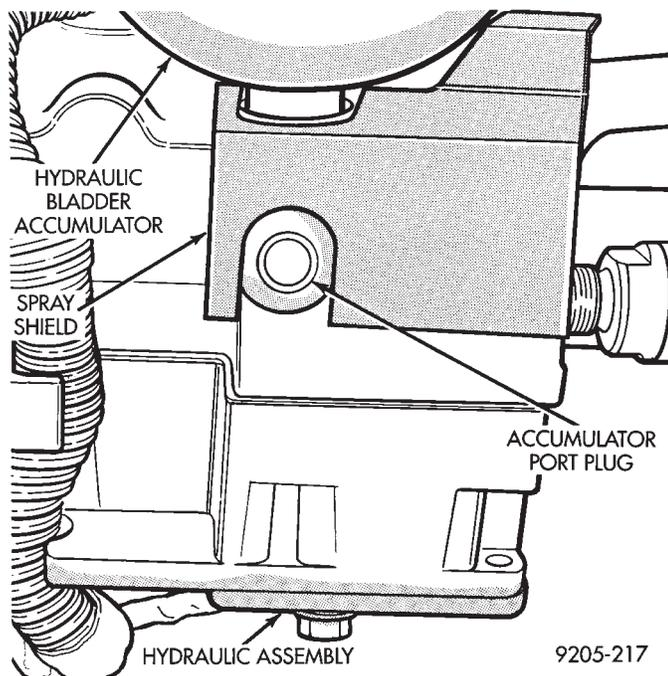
Hydraulic Assembly Accumulator Port Plug Location
